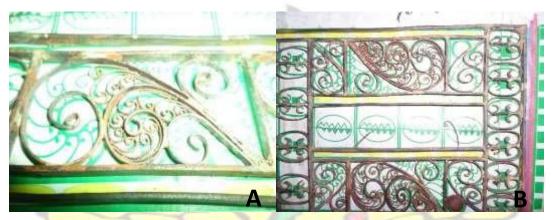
A and B: Forming and fixing of filigree infills before soldering
